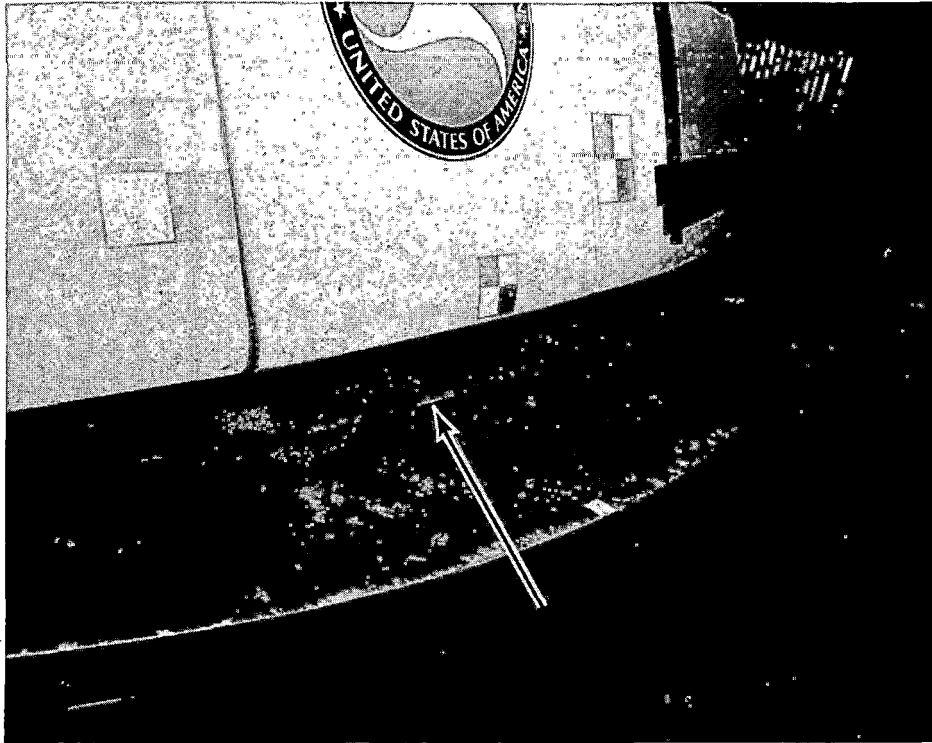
Floor Extension Plate Modification, DOTX-5 Only
